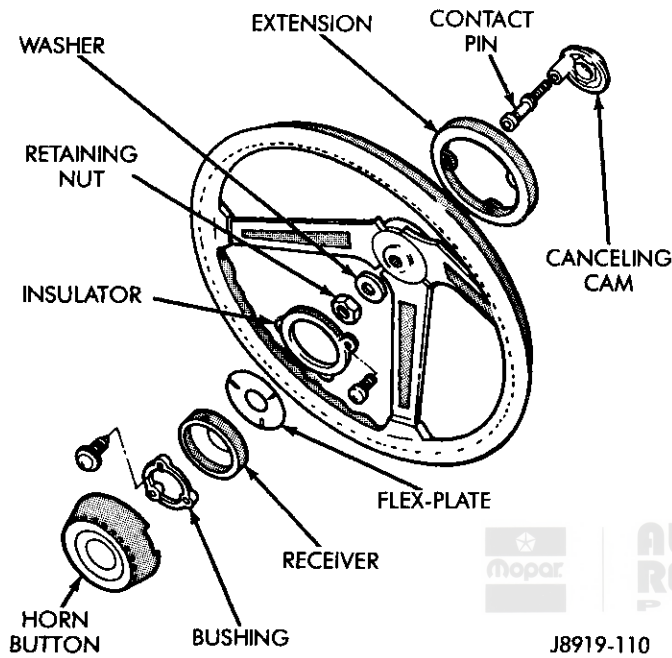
Standard Steering Wheel Cover Removal/Installation
